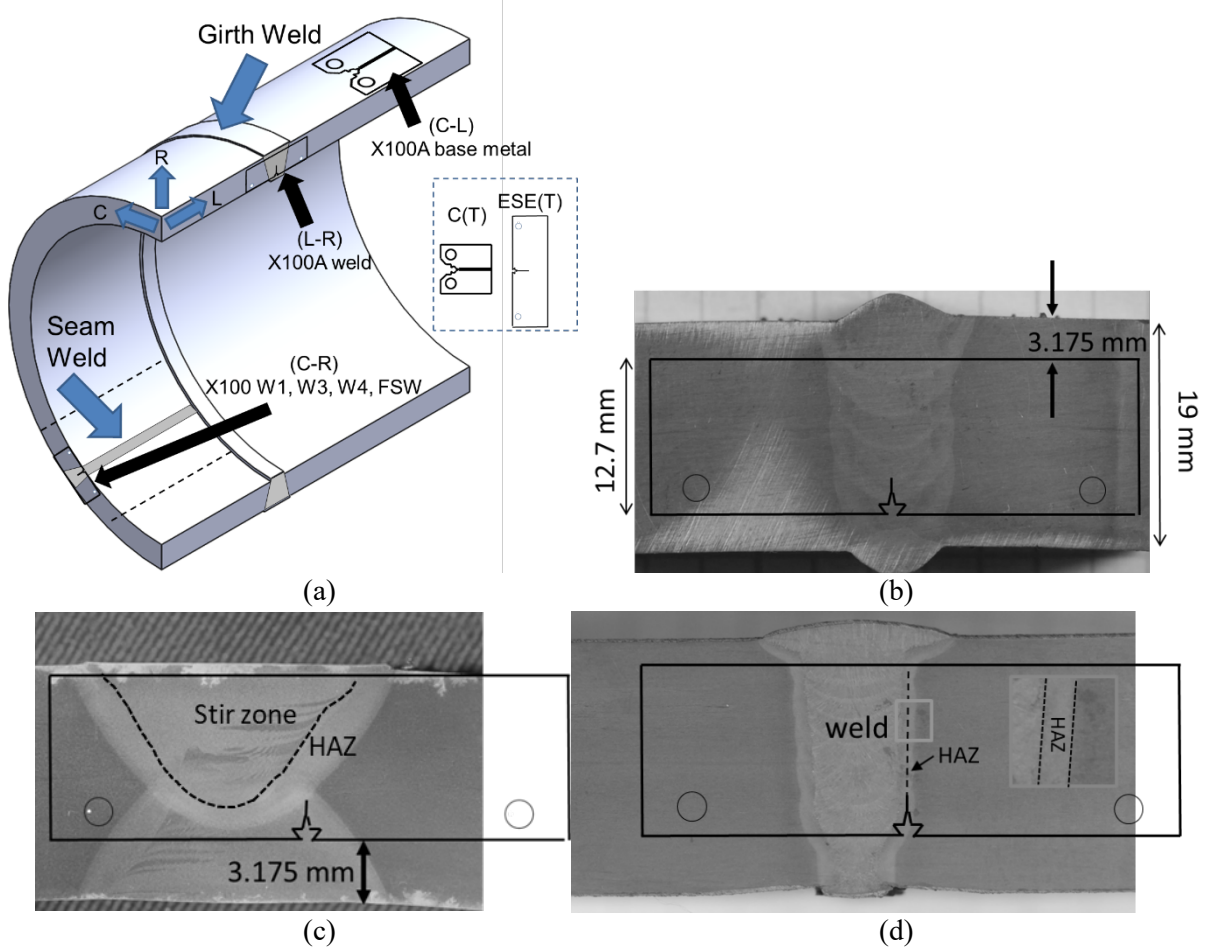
(a) Schematic of extraction locations of C(T) and ESE(T) coupons from welded pipe. The dashed lines indicate that longitudinal sections of X100A base metal were removed and subsequent seam welds were fabricated. Schematic of ESE(T) coupon extraction locations from weld and HAZ for (b) X100 W1, (c) X100 FSW HAZ, (d) X100A HAZ. Notch was positioned in approximate center of weld or HAZ such that crack has stress in transverse direction with crack driving in the through-thickness direction from inner to outer diameter. All orientations are identified with respect to the original X100A welded pipe: L-Longitudinal, C-Circumferential, R-Radial.
